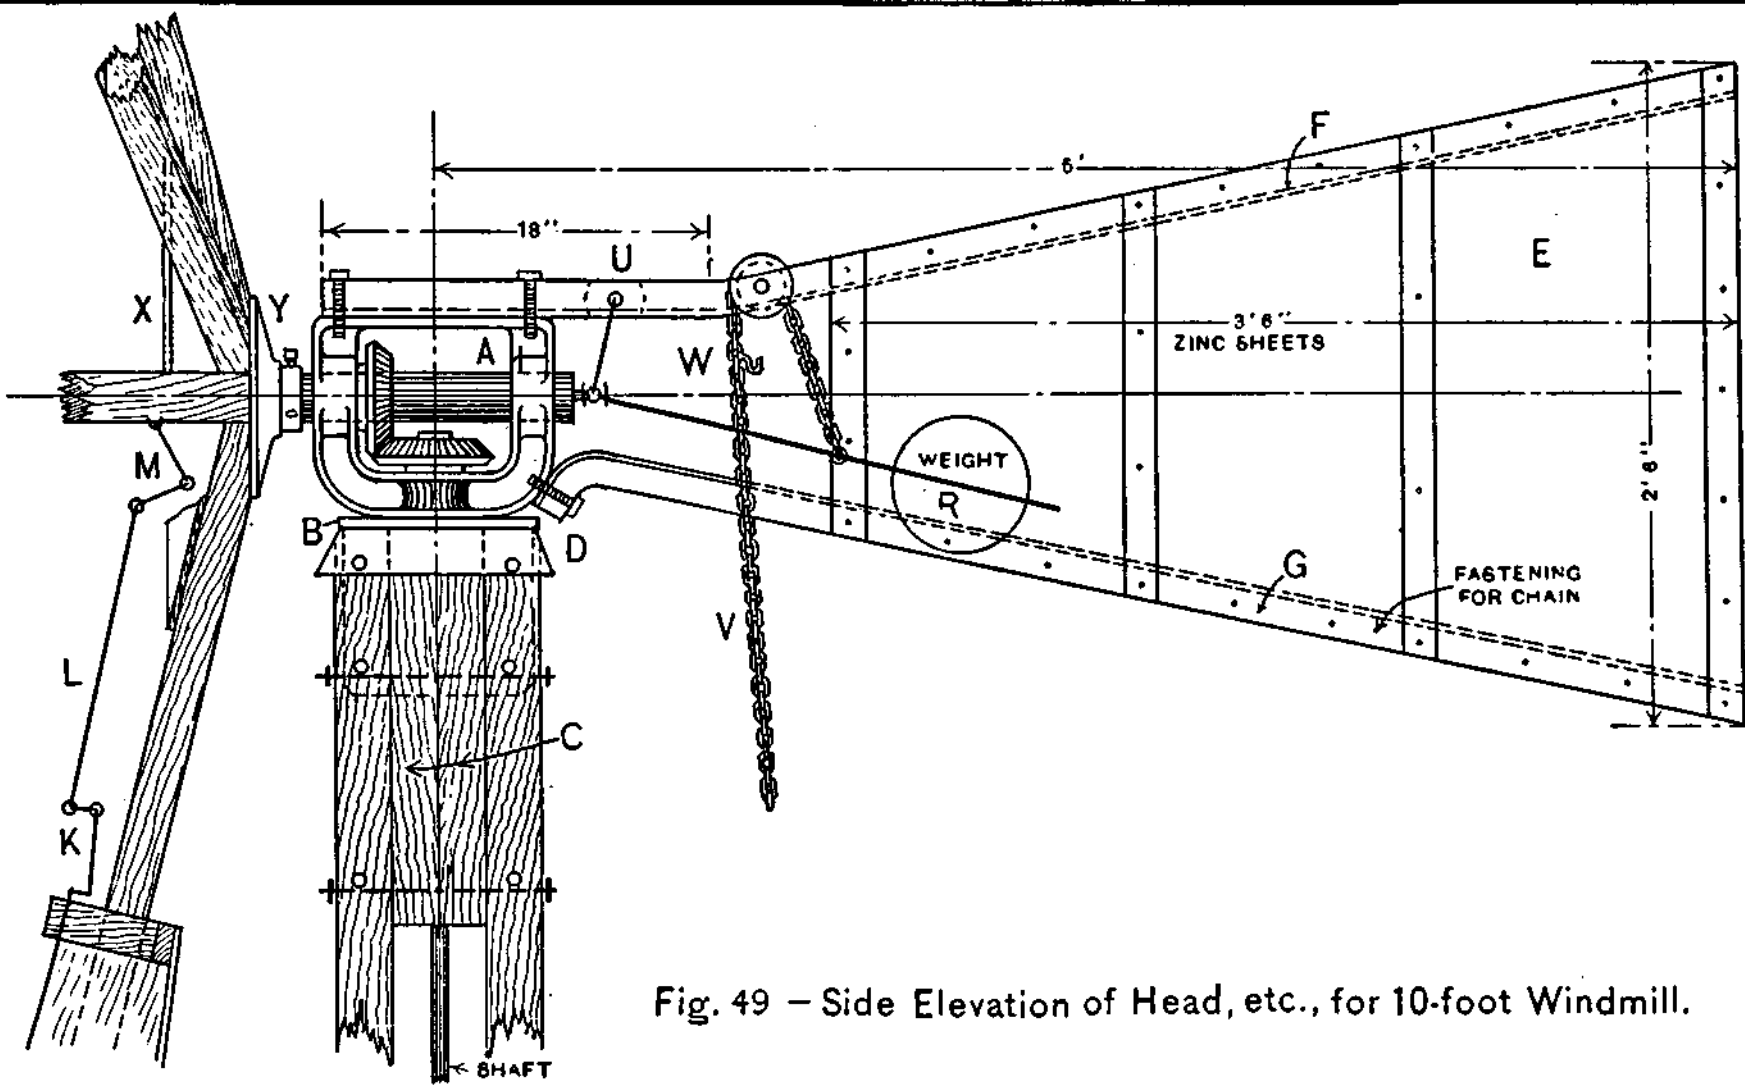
Side Elevation of Head, etc., for 10-foot Windmill.
